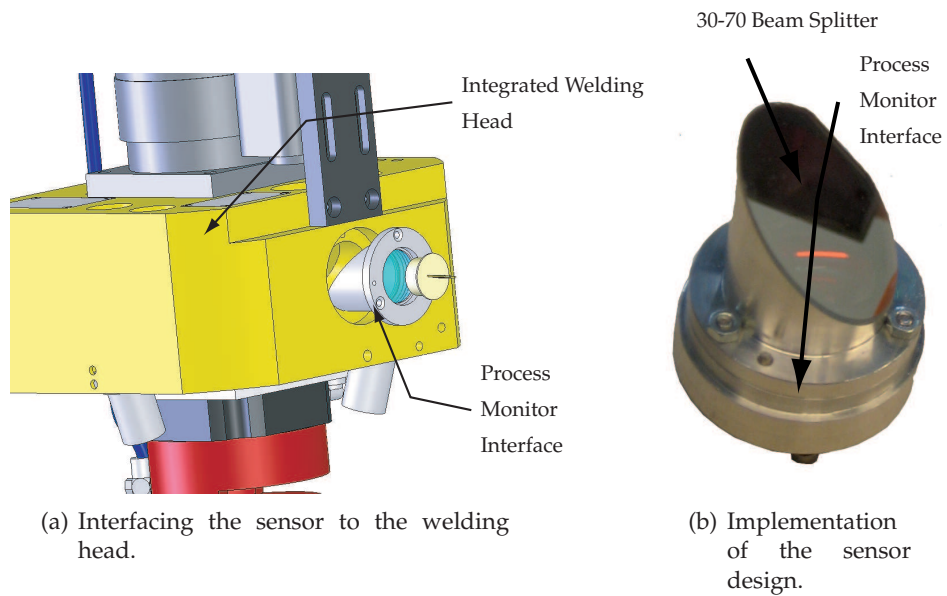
A section of the interfacing position of the process monitor sensor on the integrated laser welding head, and a picture of the implementation of the design.
